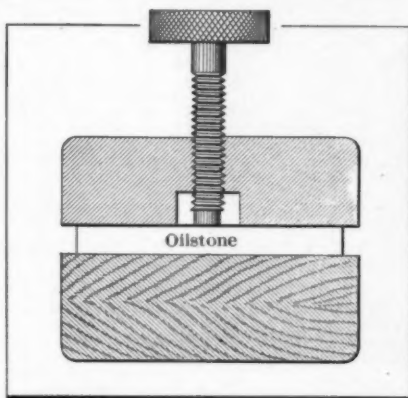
Method employed in order to true up the points of the contact screws of the coil by using an oil-stone
